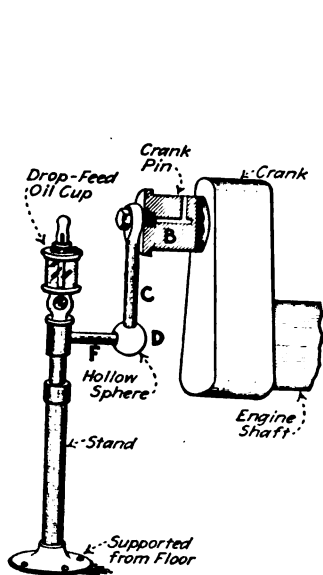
"Banjo" crank-pin oiler for side-crank engine.
